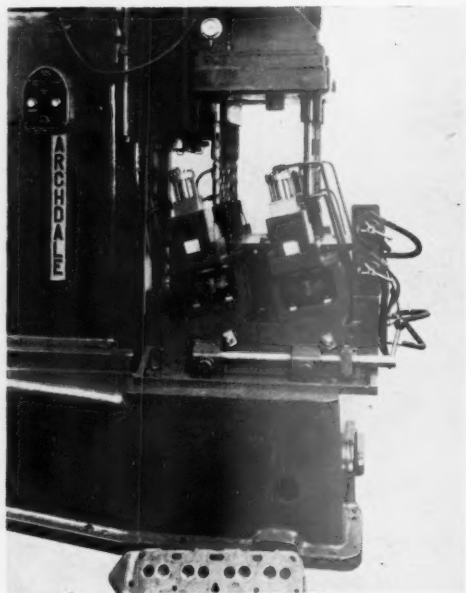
Archdale vertical drilling machine with two-stage swivelling fixtures to accommodate all three types of Fordson Major cylinder heads
